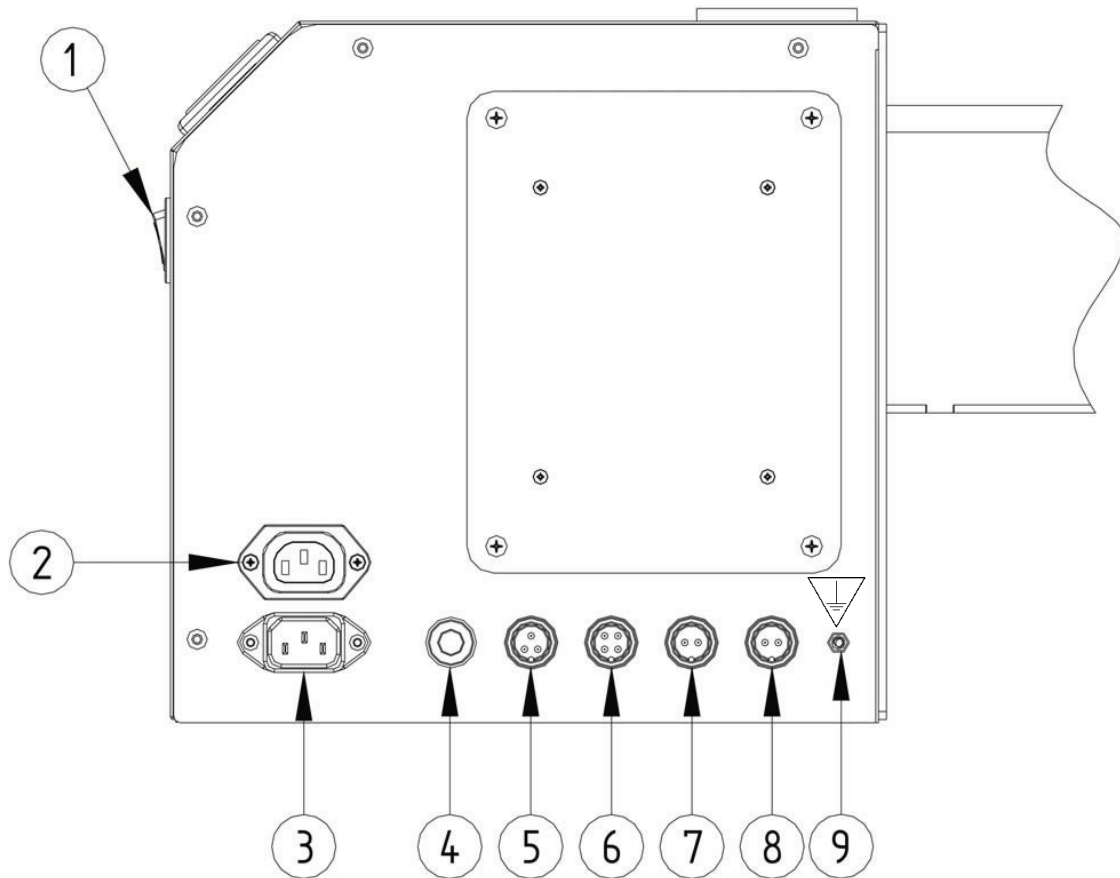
FIGURE "B": ASSEMBLY DIAGRAM FOR BURNER ON BOILER
